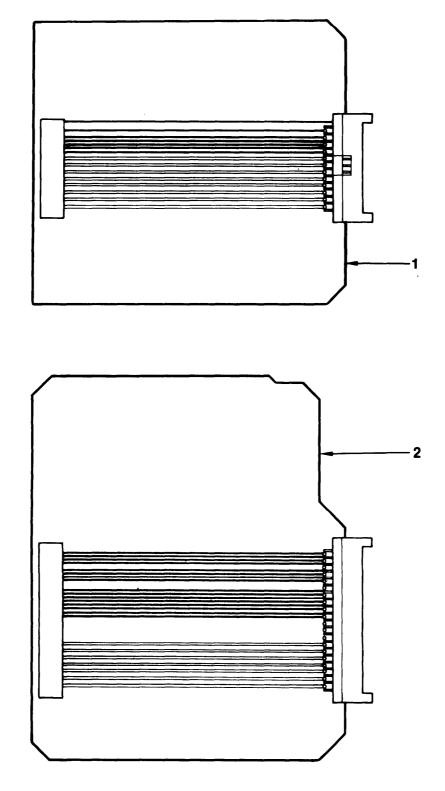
Mother Board Assembly (Sheet 2 of 2)
